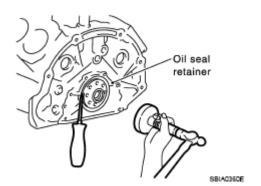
Pressing Rear Oil Seal Using Drift Courtesy of NISSAN MOTOR CO., U.S.A.
